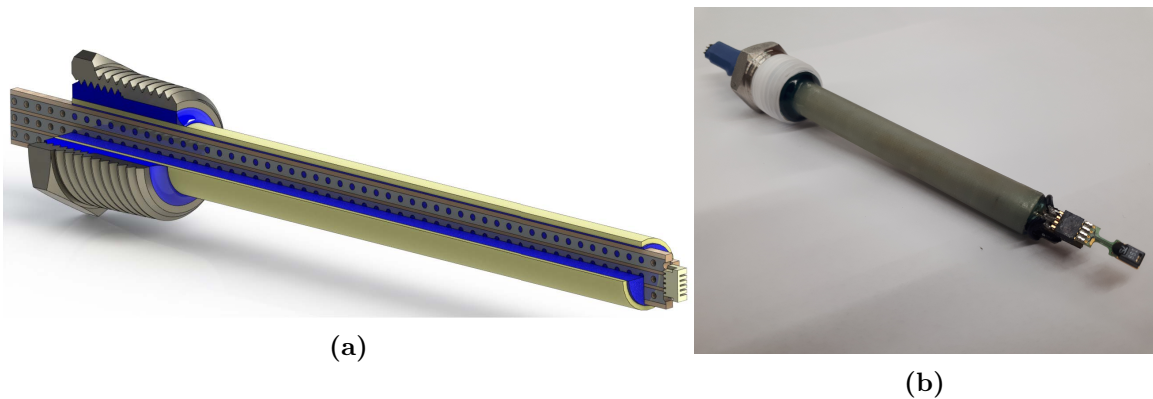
CAD section view (a) and finished picture (b) of the sensor feed through assembly
